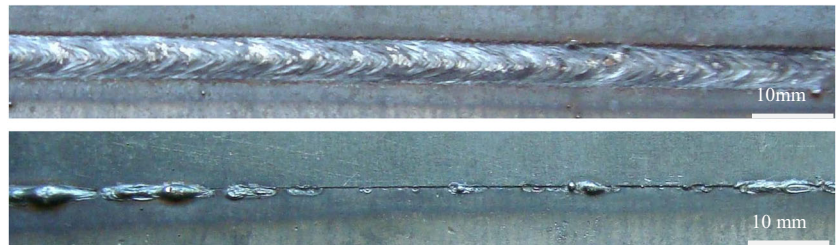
The photograph of cap side and root side of welding seam
